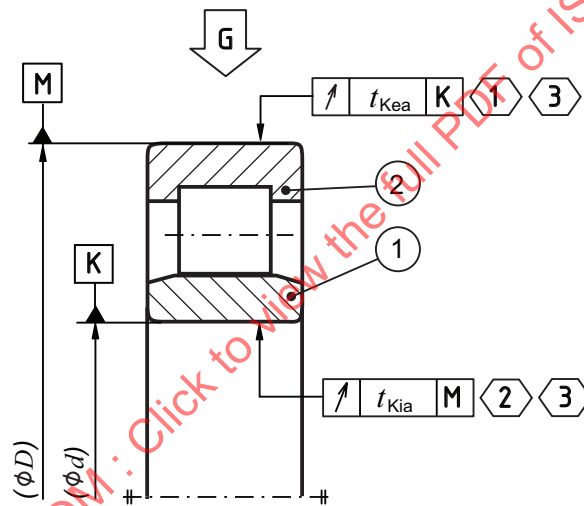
Geometrical tolerances for single components for bearing with cylindrical bore
